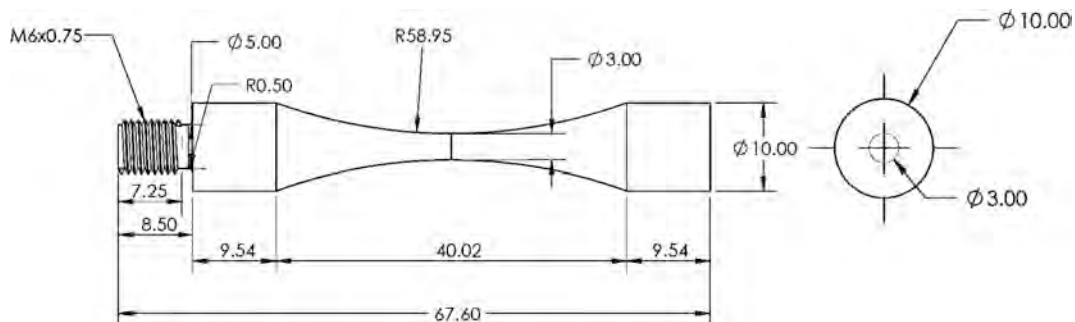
Hourglass specimen geometry and dimensions for USF testing of Al2139ZrTi. All dimensions are in mm.
